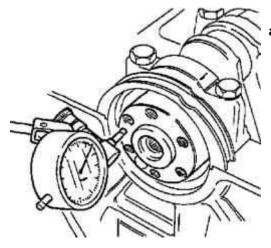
Measurement of the axial clearance of the crankshaft
